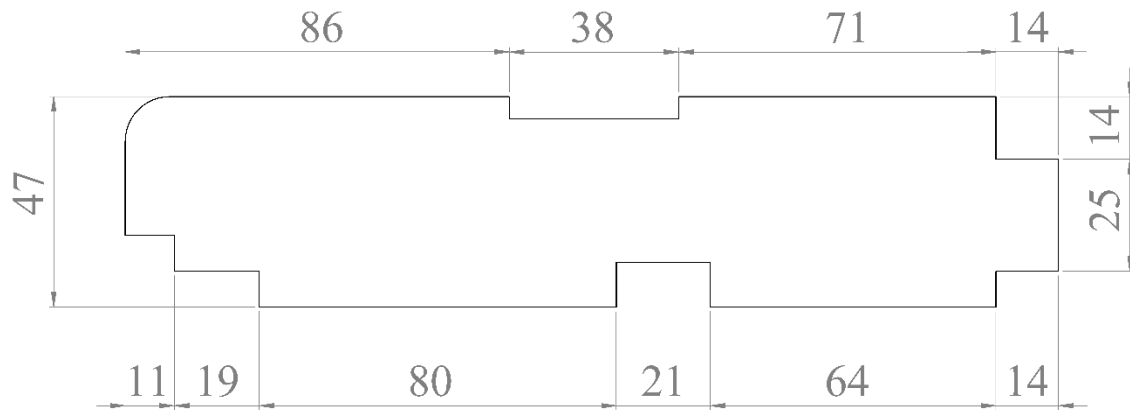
Dimensioned drawing of the simulated PCB, all dimensions are in mm
